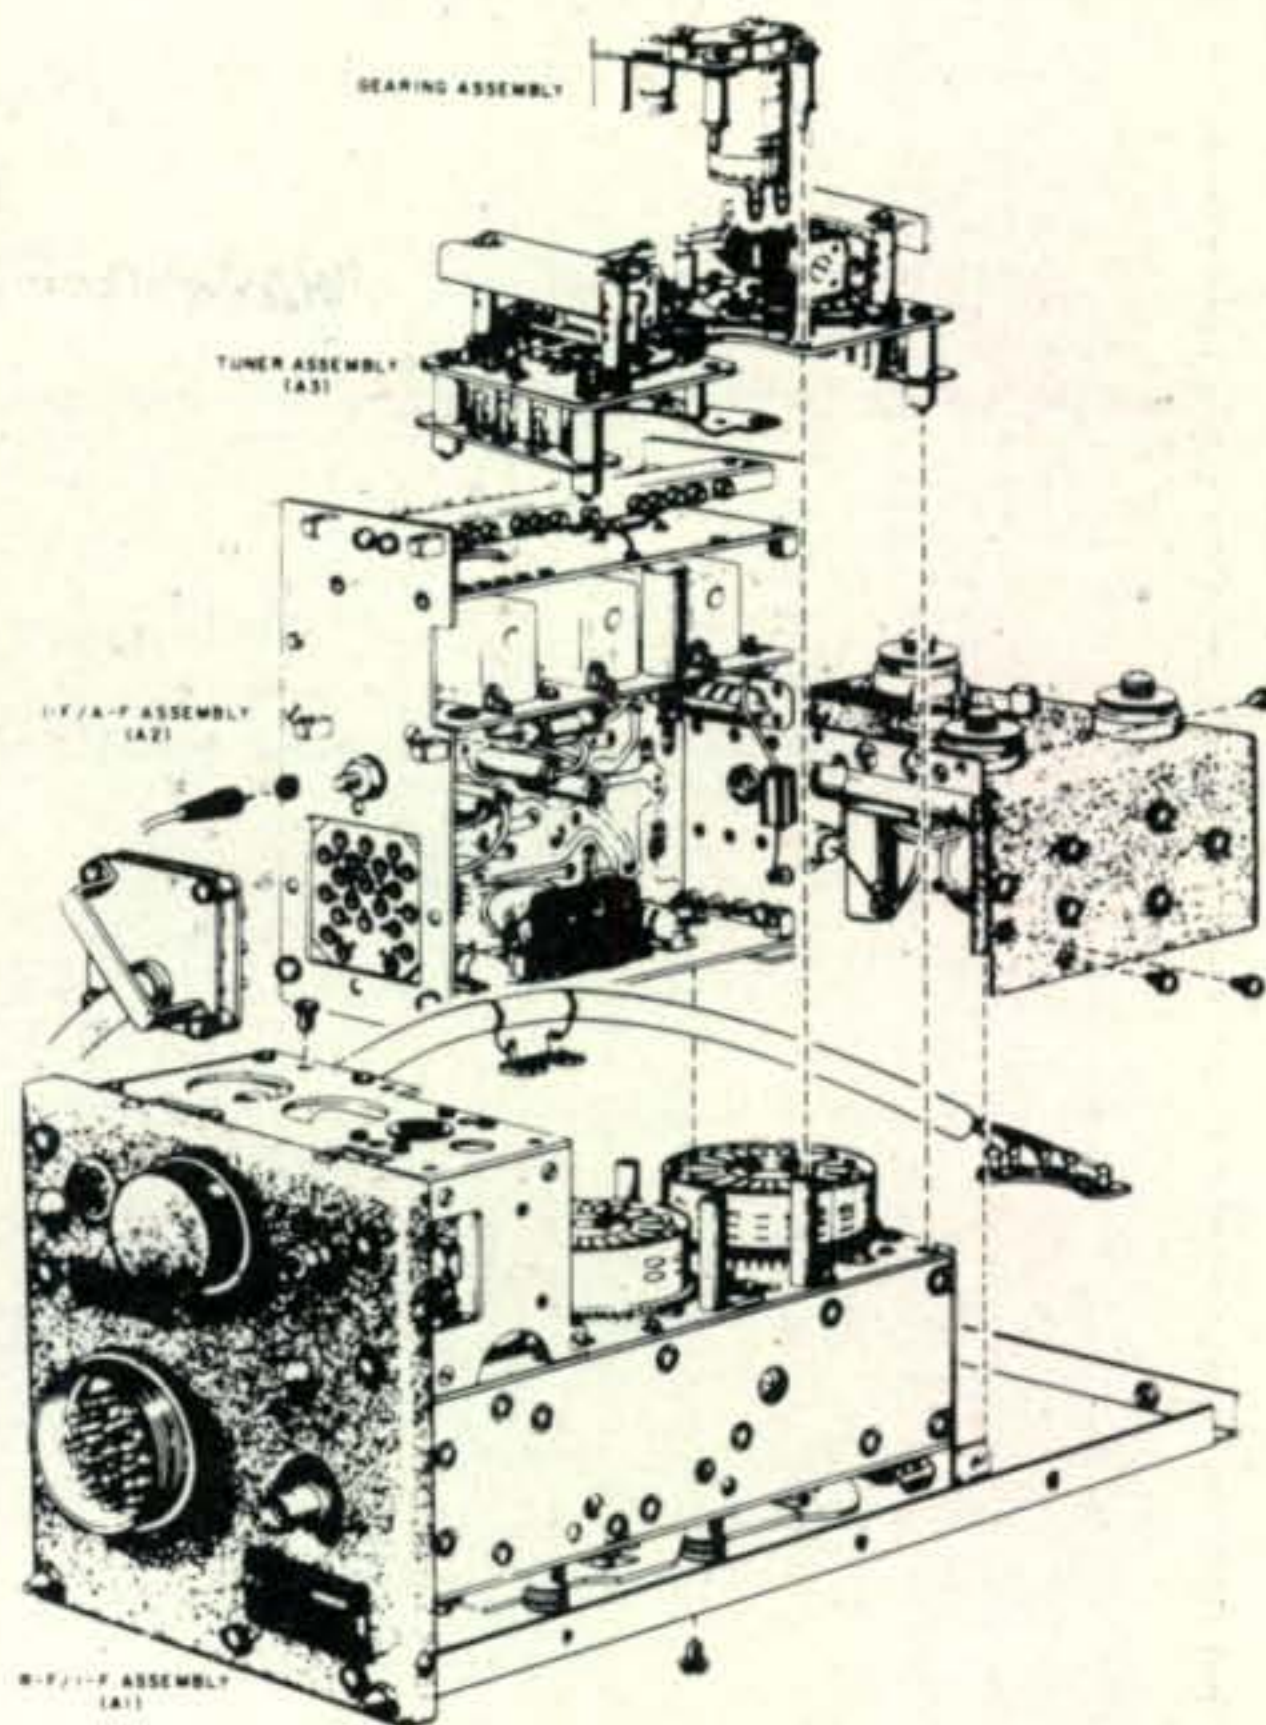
Exploded view of the R-34 receiver, showing how a 190 channel, crystal-controlled double-conversion circuit was built into the same dimensions that housed the familiar BC-453.
